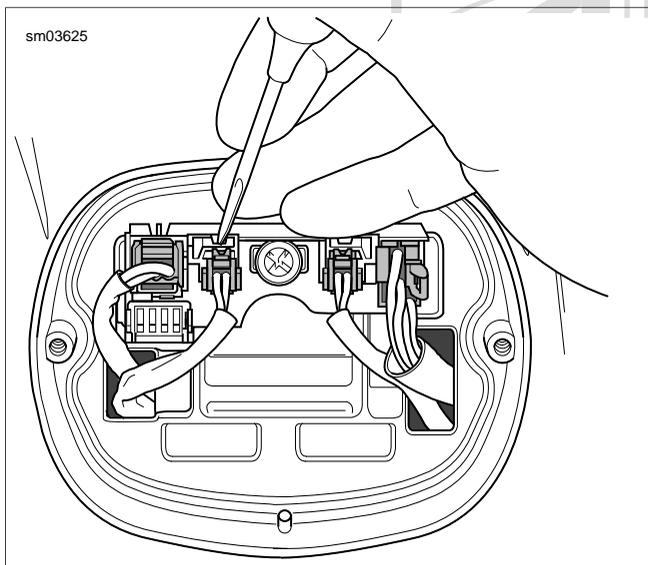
Use Pick Tool to Release Left Turn Signal Lamp Socket
